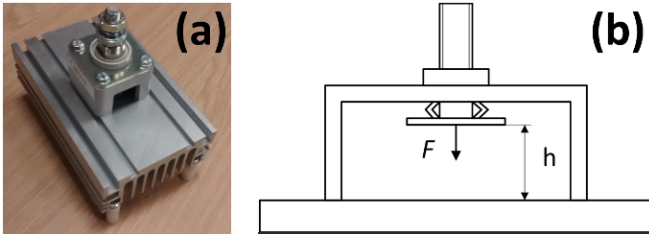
(a) Clamp BX-42 and heatsink PS136-150B assembly, (b) Operating mechanism of the BX-42 box clamp
